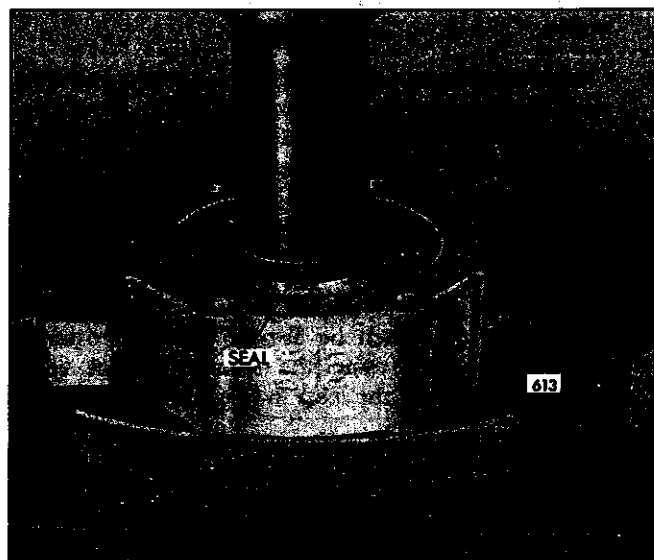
Installing Hydrostarter Shaft Seal in Valve Plate
